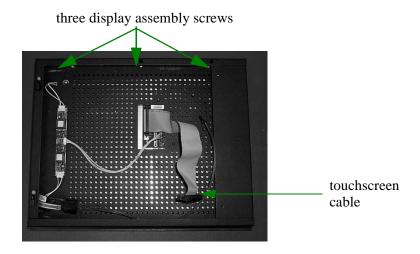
Sharp (15" Unit) Display Assembly Cable Locations
